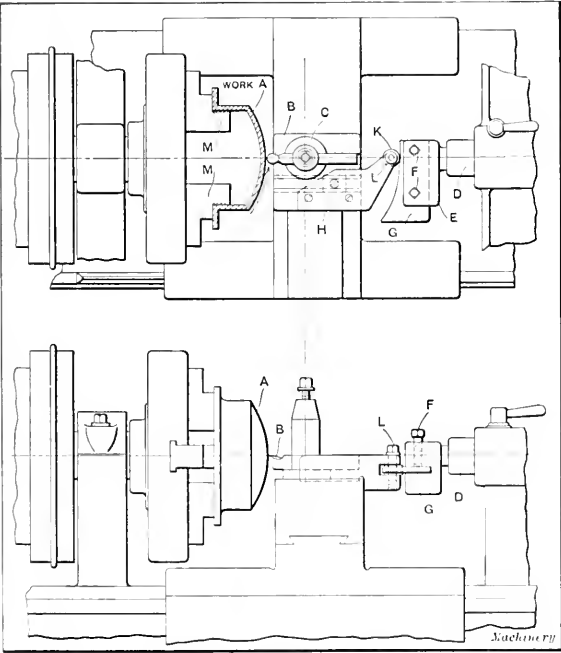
Simple Attachment for Convex Turning in Engine Lathe
